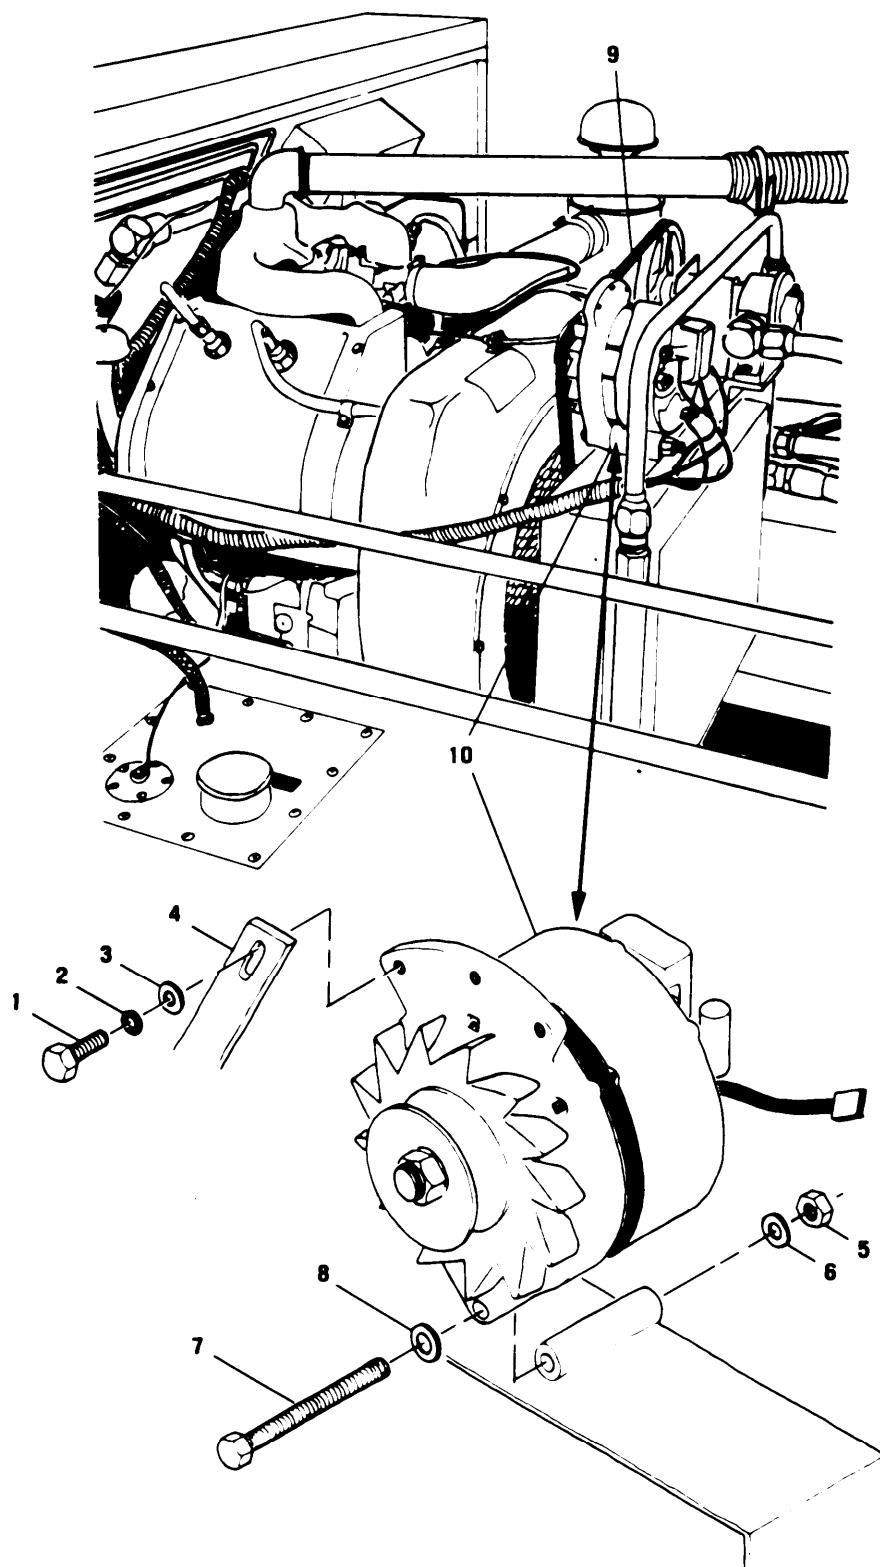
, Alternator Voltage Regulator (Sheet 1 of 2)
